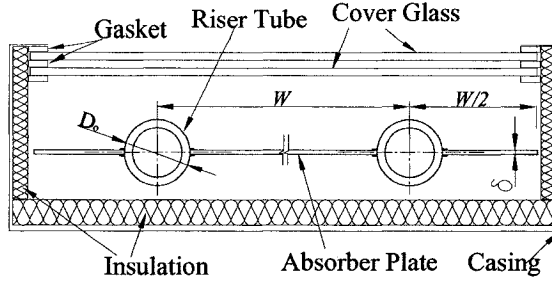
Typical cross section of a Sheet-and-Tube Solar Collector
